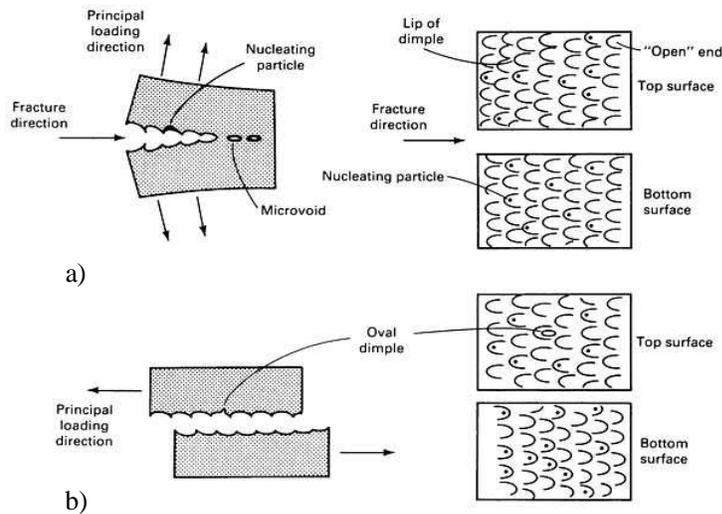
Examples of ductile fractures with varying dimple shapes. a) Tearing produces elongated dimples on both fracture surfaces that point back to the crack origin; b) shear stresses generate dimples elongated in the shearing direction [3].
